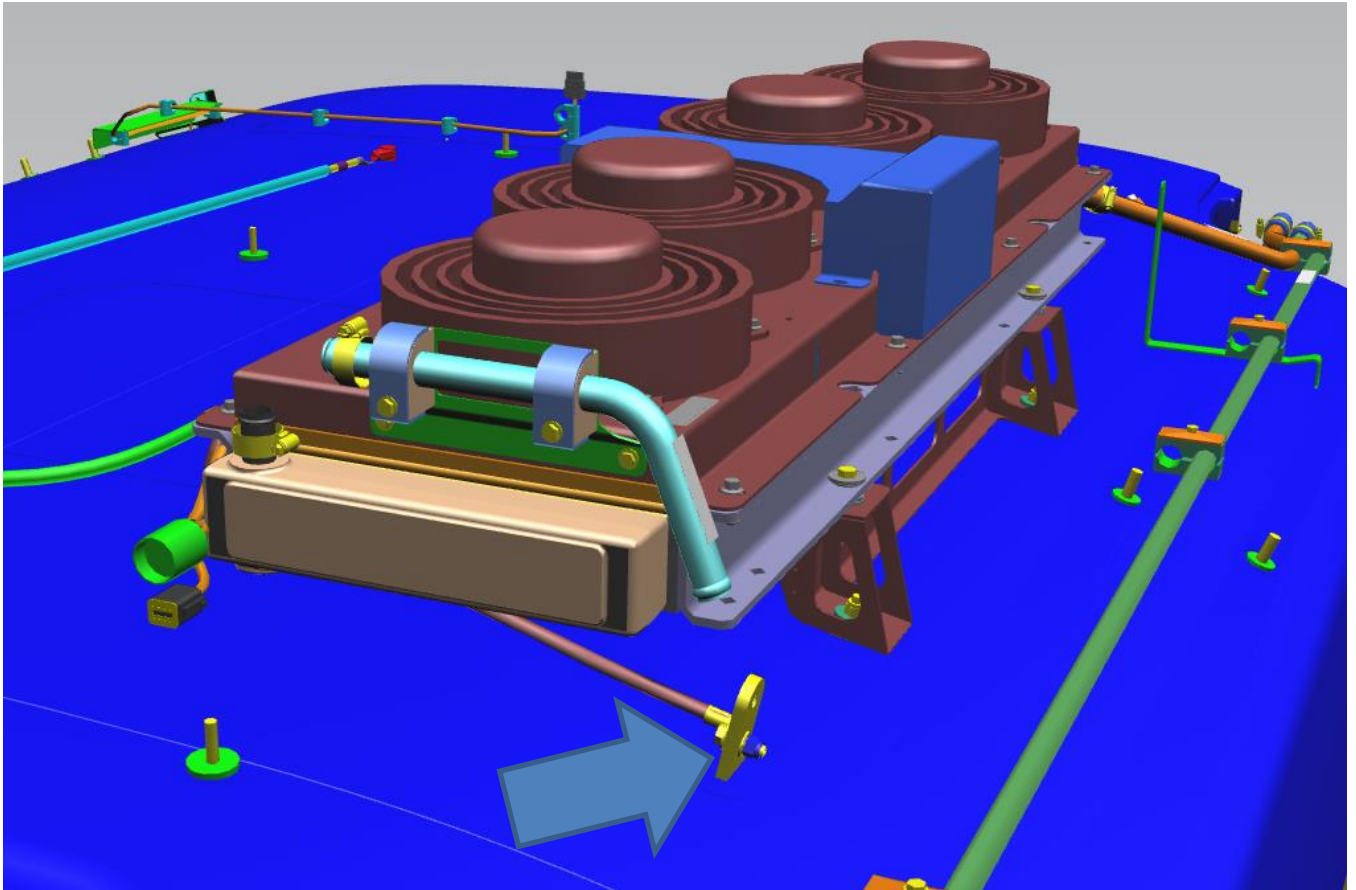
Motor Inverter Cooling Fan Grounding Point. Parts removed for clarity.
